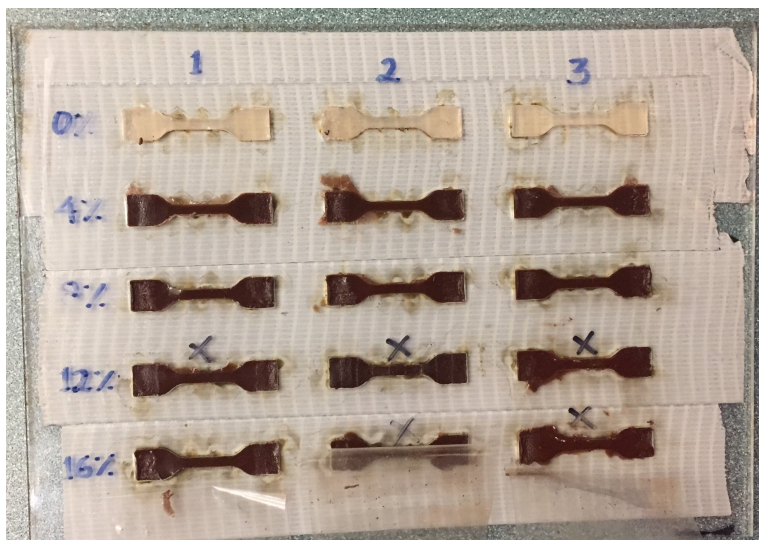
Dogbone Acrylic Mold with Samples.
